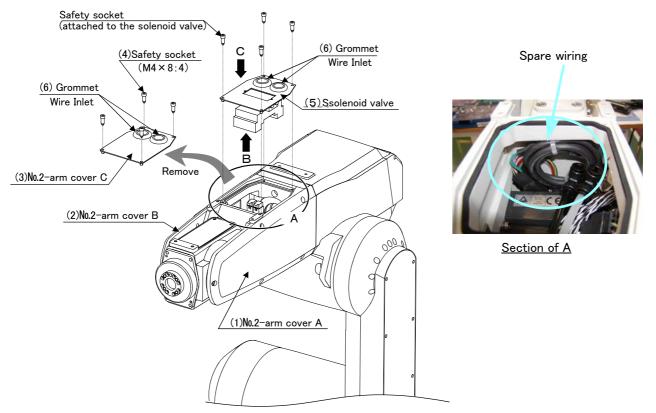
Drawer of spare wiring (Fore arm side)
